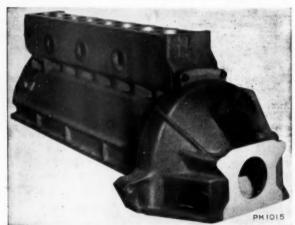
Cylinder block and flywheel housing on which end pad is Rigidmiled.
